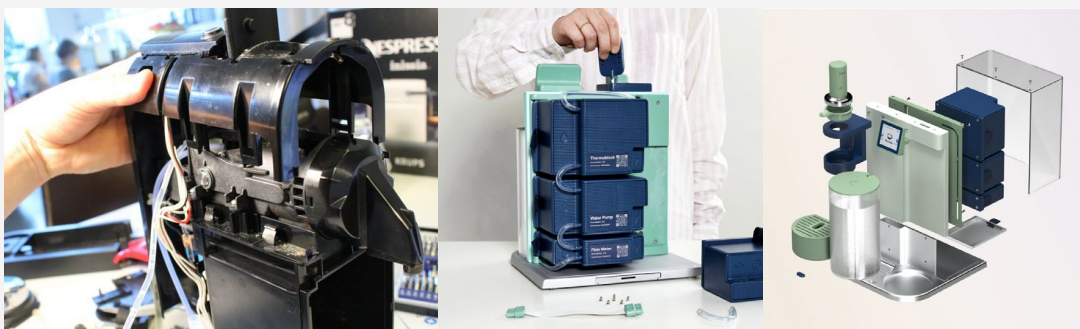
The inside of a Nespresso machine, constructed to be compact but hard to access
